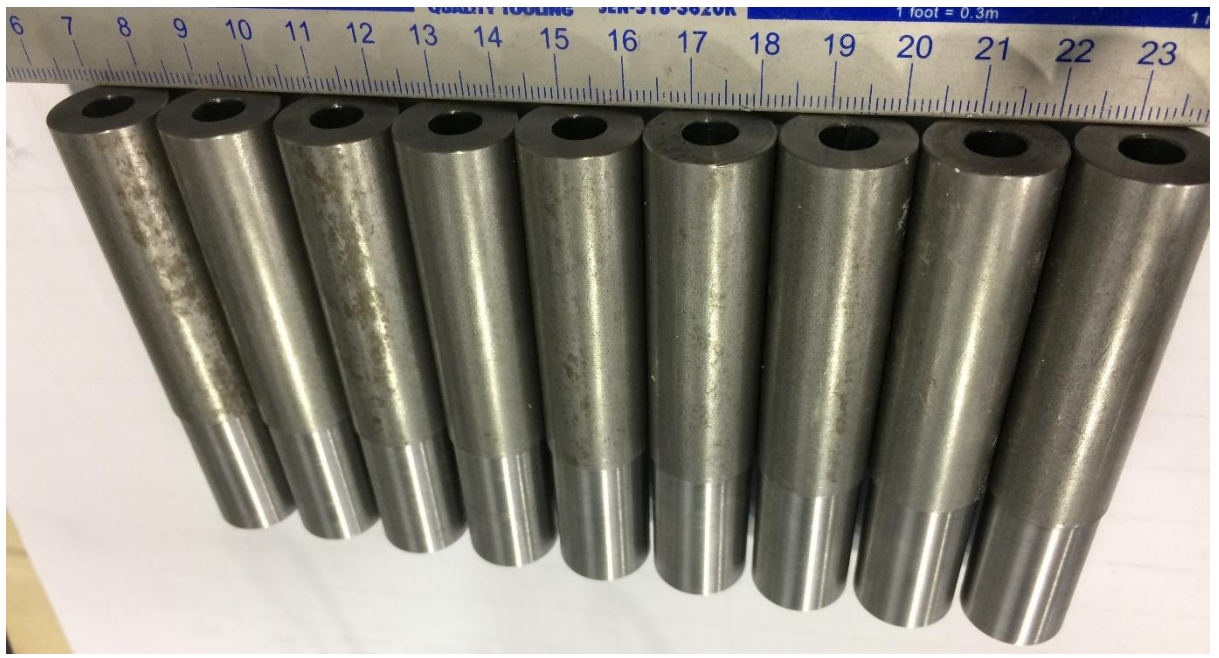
Machined moulds used for GI processing of cutting test samples.
